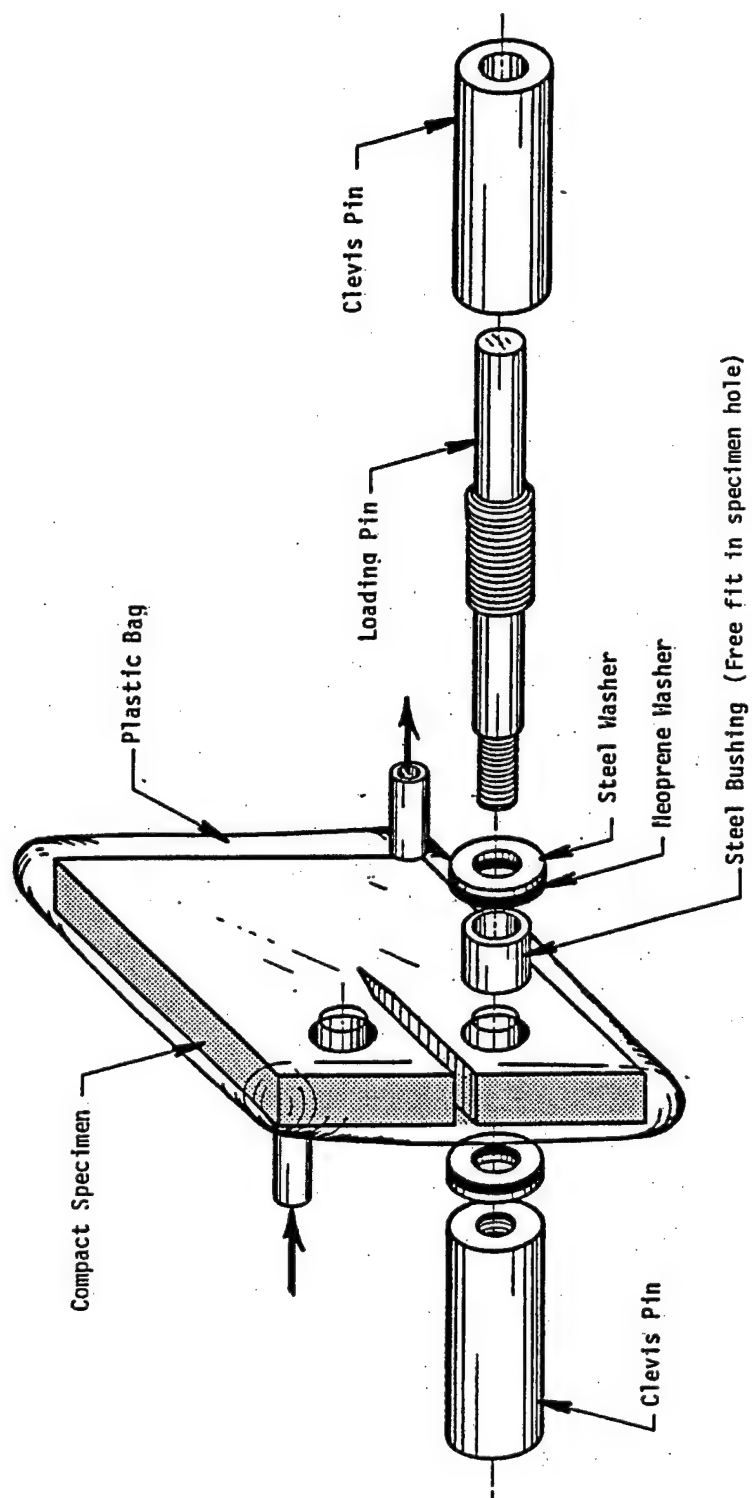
Schematic of the sealing method used to perform corrosion fatigue crack growth tests on a pin-loaded, C(T) specimen.
